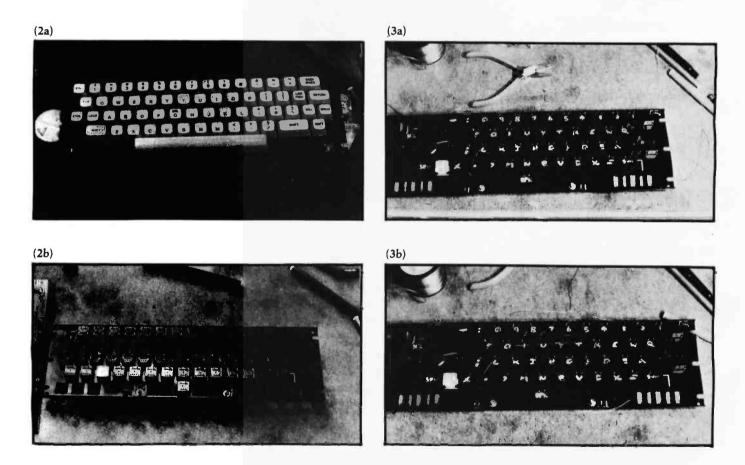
The standard-sized keyboard shown in photo 2a is made of a metal plate into which the keyswitches are pressed. Photo 2b shows the solder lugs to which connections will be made.
